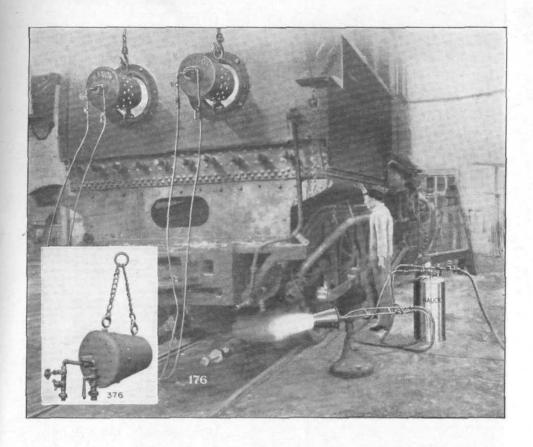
Two Hauck Compressed Air Type Burners raising steam for testing locomotive boilers.
